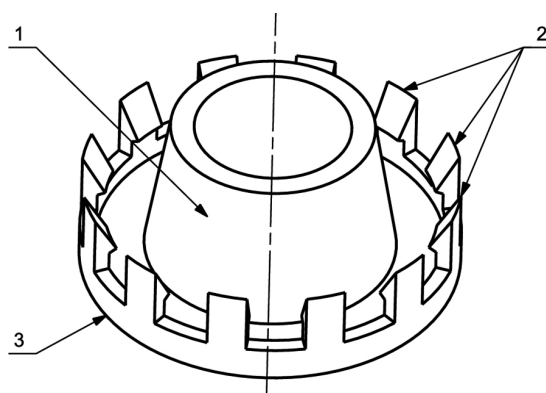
Components of a nozzle plug fabricated by 3D printing: 1 – low-explosive powder chamber, 2 – snap locks on the nozzle, and 3 – nozzle plug bottom
